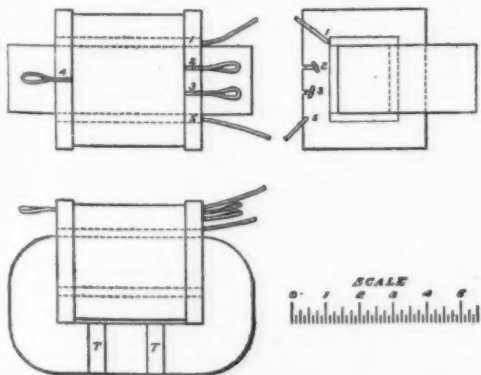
DETAILS OF AUTOTRANSFORMER.
